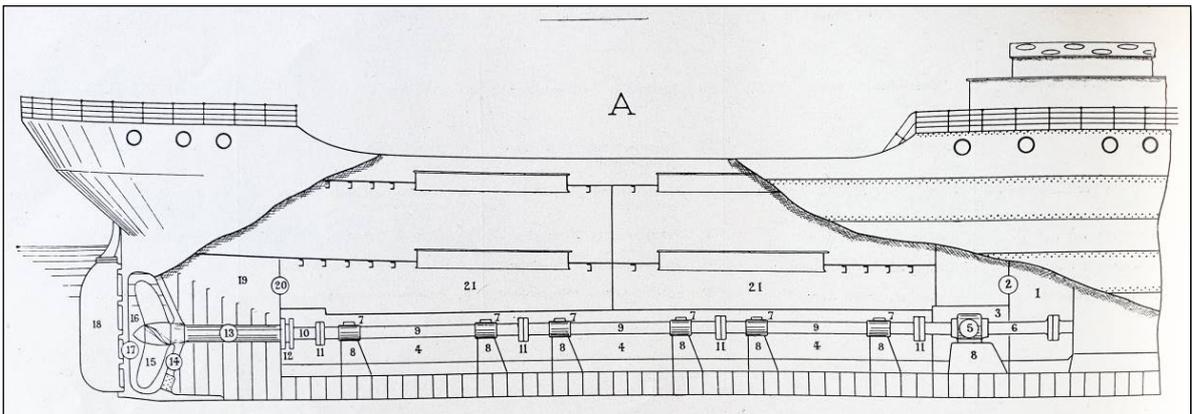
Typical stern propulsion drive shaft of early twentieth century coastal freighter, showing shaft tunnel (4), drive shaft (9), stern gland (12), propeller shaft (13) (Image: Bataille and Brunet, 1937:71)
